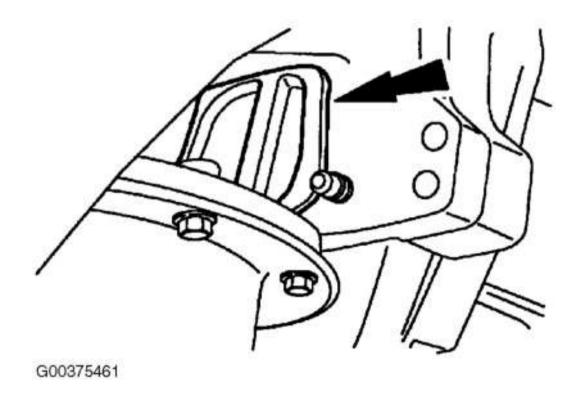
Locating Solenoid Body Electrical Connector Courtesy of FORD MOTOR CO.
